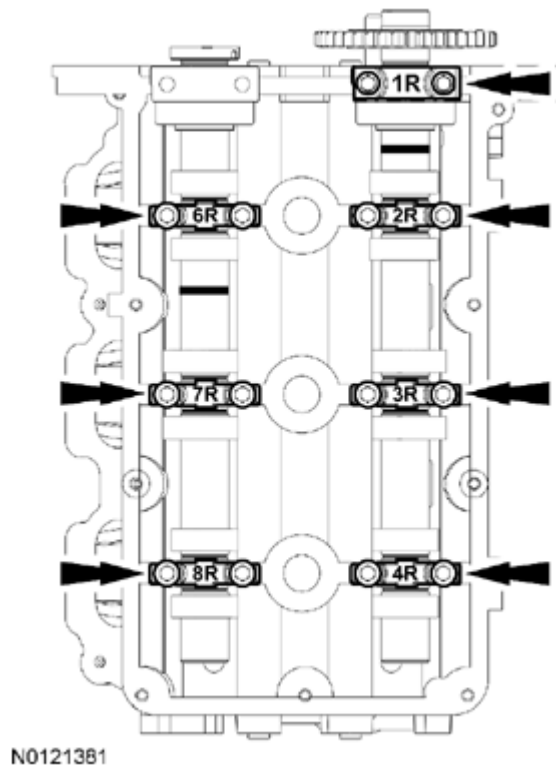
Locating Camshaft Bearing Cap Position And Orientation Marks
